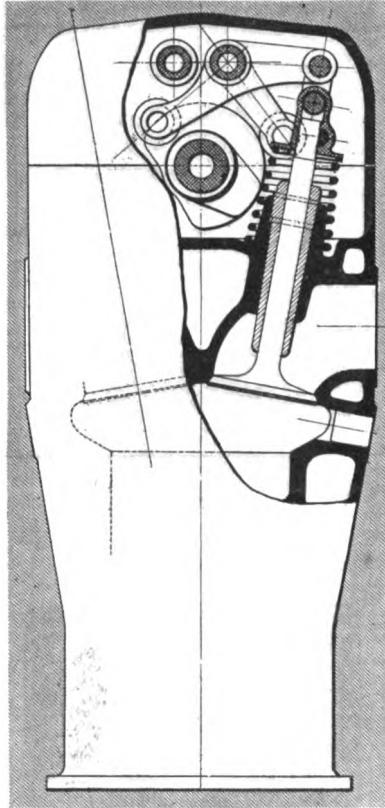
Section through cylinder head of Schneider motor, showing overhead cam and positive operation of valves. Spring shown is a precaution only
